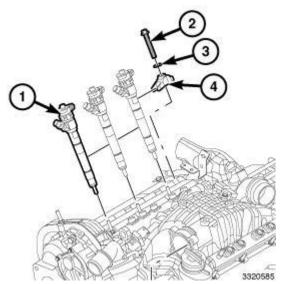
Fuel Injector, Hold Down Bolt, Washer & Retaining Claw Courtesy of CHRYSLER GROUP, LLC
